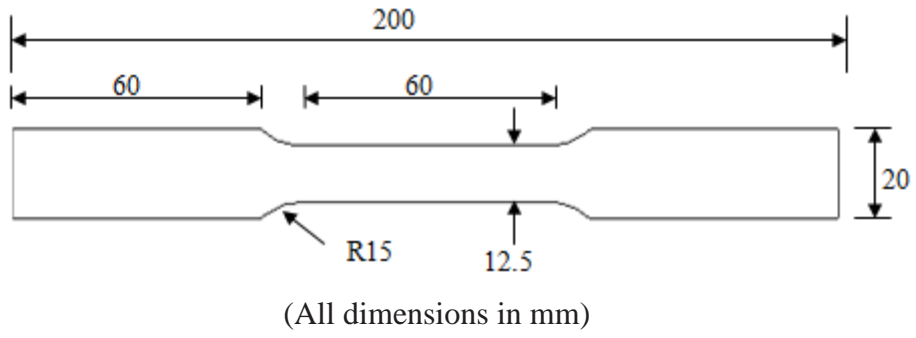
Tensile Test specimen according to ASTM E8/E8M-09
